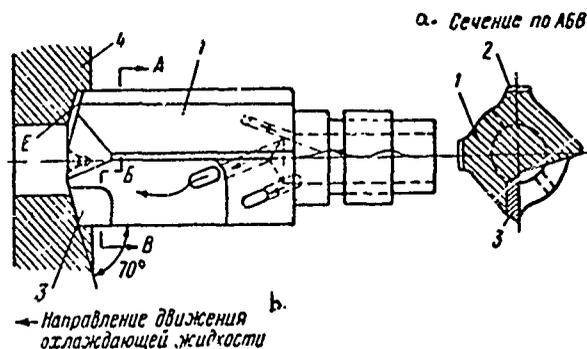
One-sided cutting scraping drill with a hard alloy blade for expansion of deep holes
